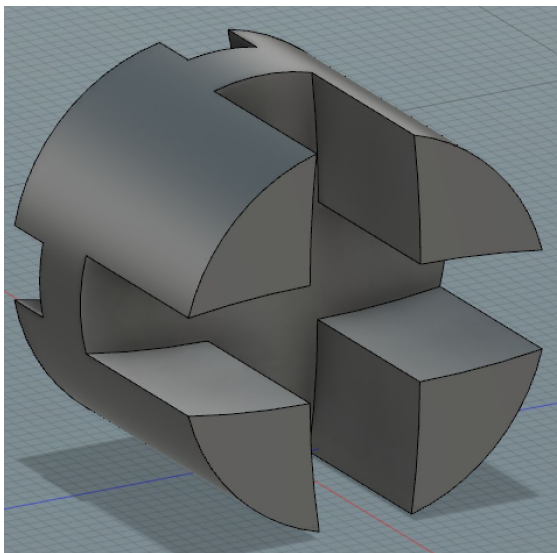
uTune Peg Clip Motor Attachment: Peg Side
